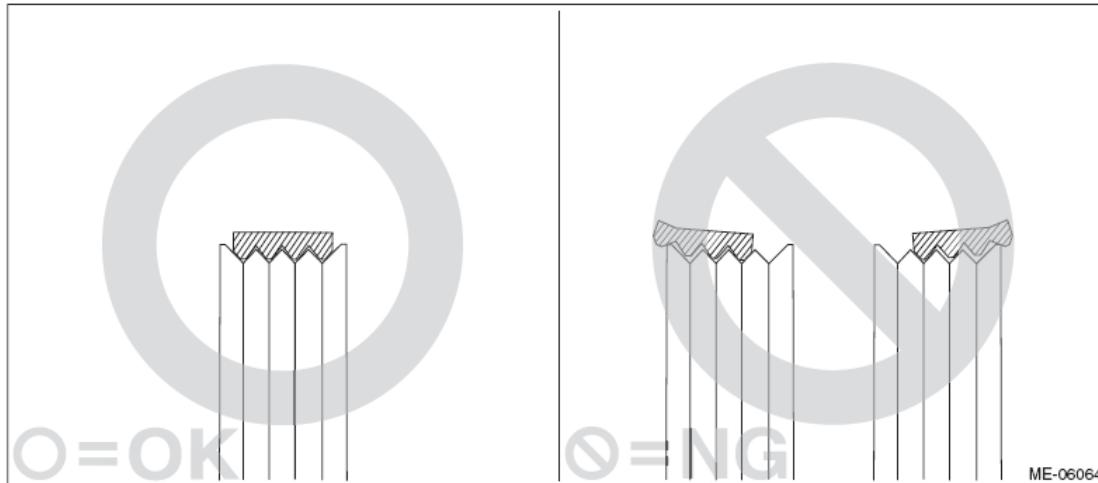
Identifying V-Belt Ribs Securely Placed Conditions
